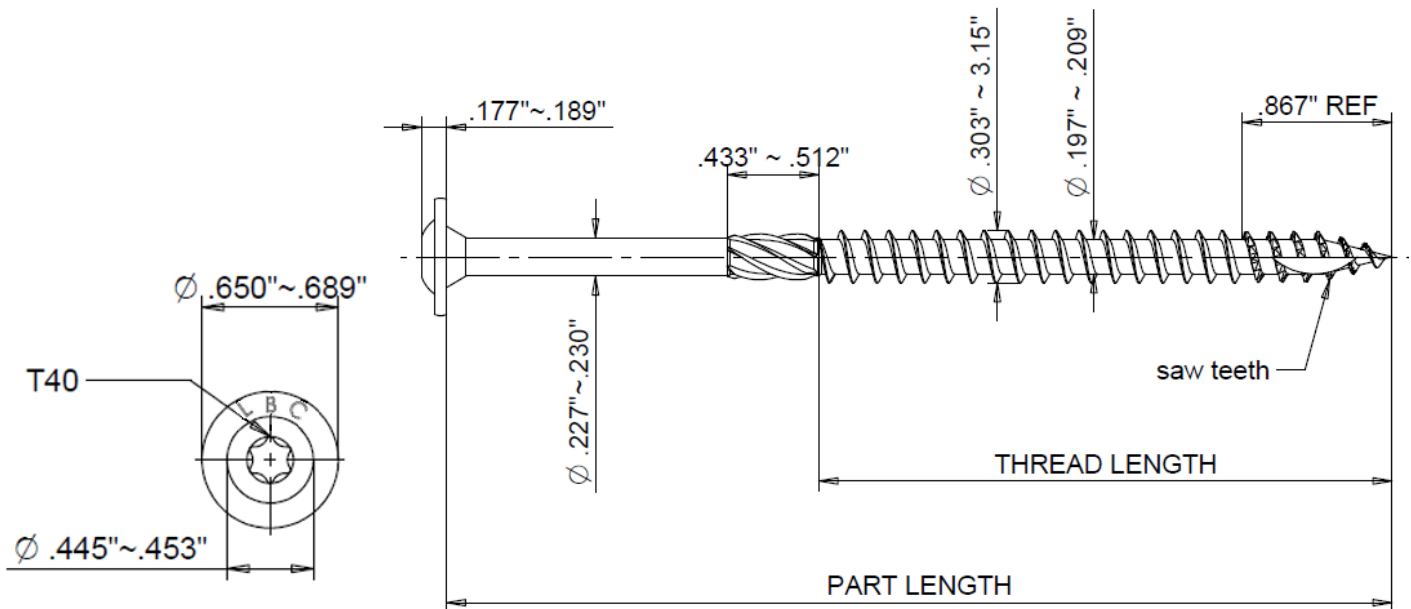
FRAMEGRIP WAFER HEAD TORX 40 WOOD SCREW
